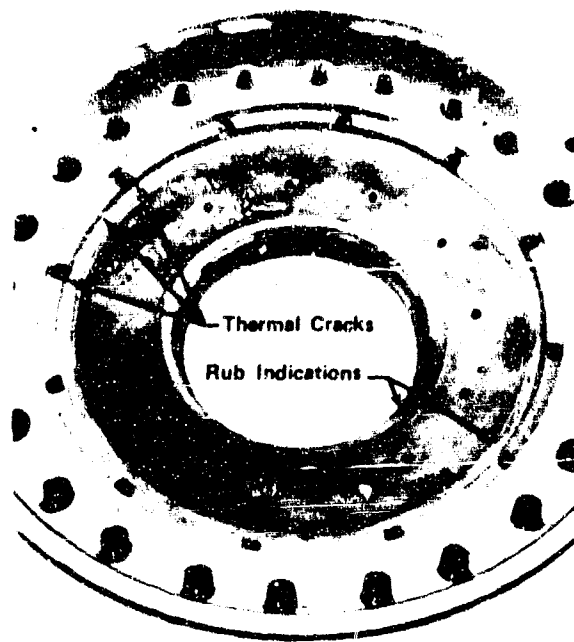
Build 2 Post-Test View Showing Thermal Cracks in the Rear Leaded Bronze Rub Face and Rub Indications from Both Rear Thrust Piston Seal Lands
